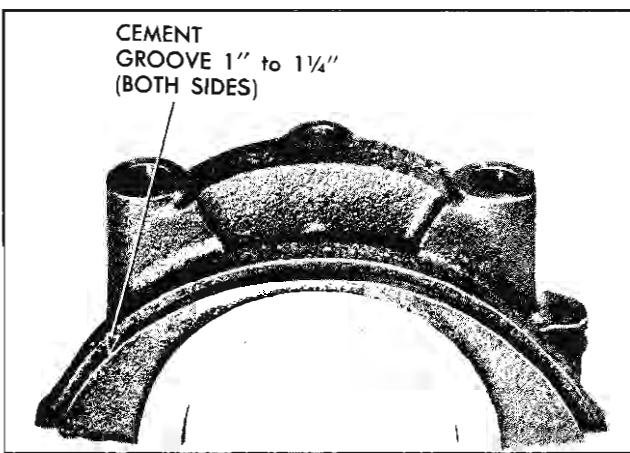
Oil Pan Gasket Positioned in Bearing Cap
